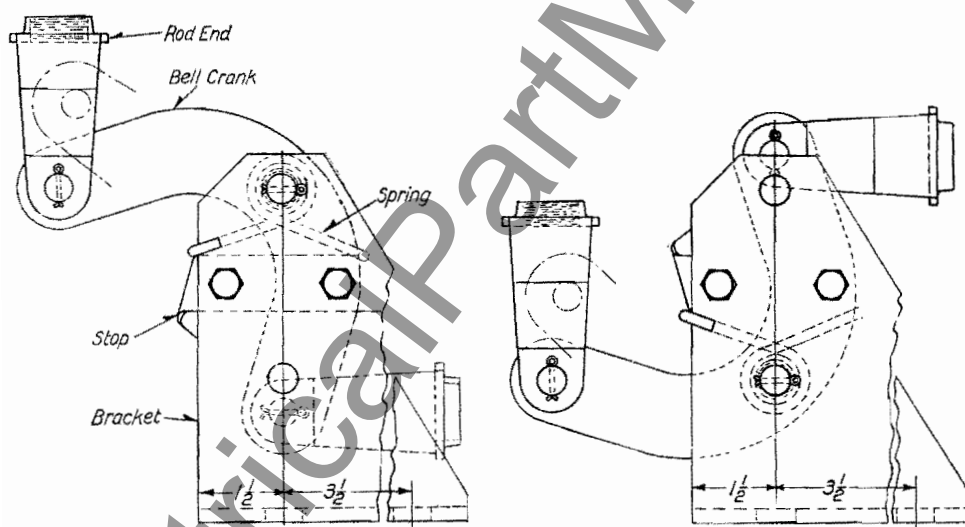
ACCELERATING DEVICE SHOWING ASSEMBLY FOR ABOVE AND BELOW FLOOR MOUNTING
